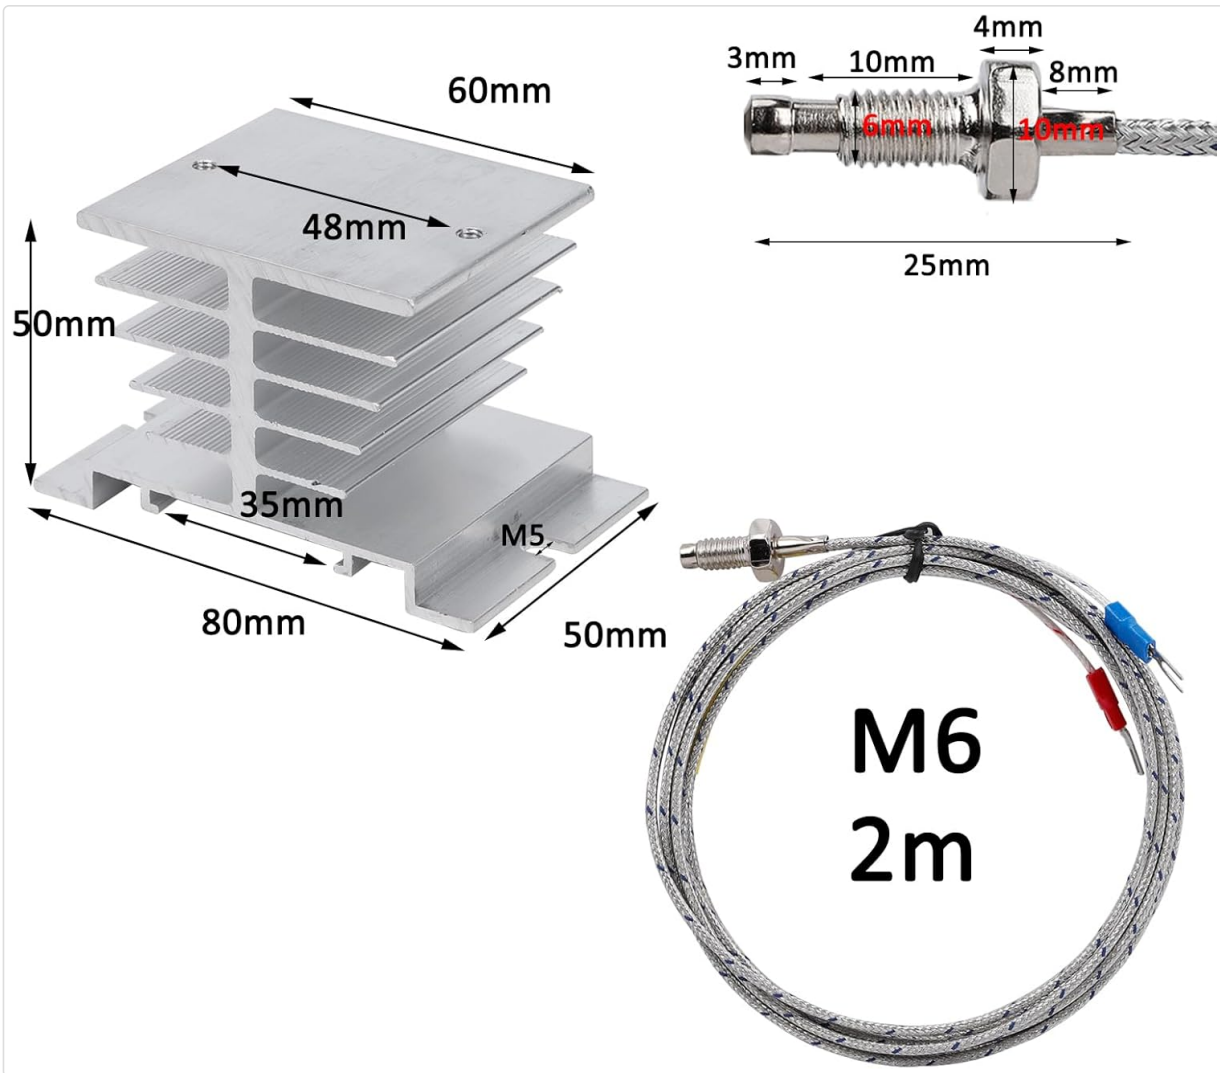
Dimensions of the heat sink (80x50x50mm) and the M6 K-type screw thermocouple (2m cable length).
